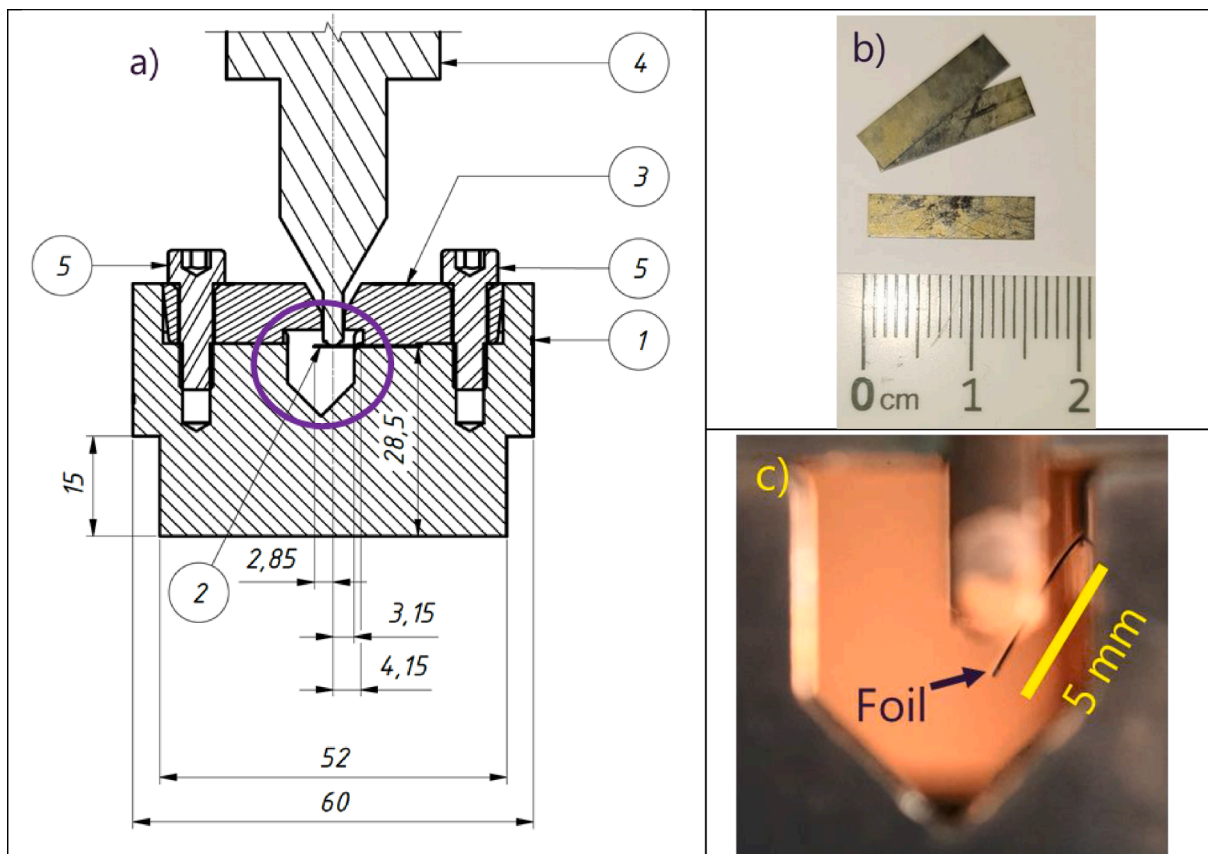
a) Drawing of the setup for cantilever bend tests of foil specimens. b) The foil specimens  $16 \times 4.2 \text{ mm}^2$ . c) A photograph of the foil specimen bent to the maximum deflection angle of  $60^\circ$ .
